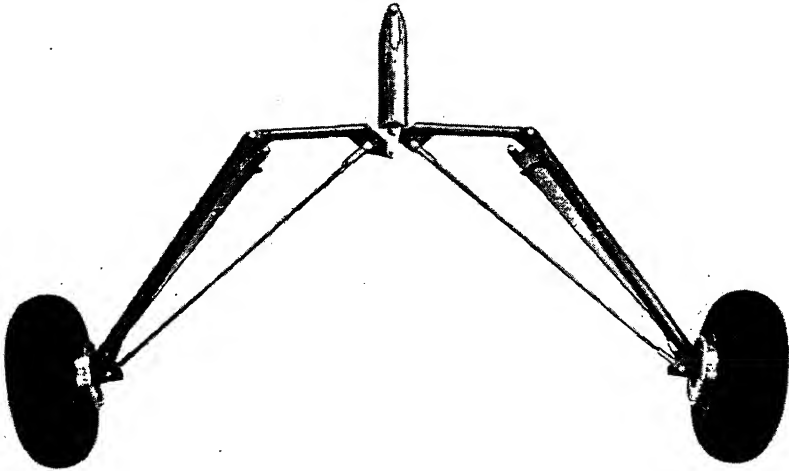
Landing Gear. (Interstate Aircraft and Engineering Corporation.)
